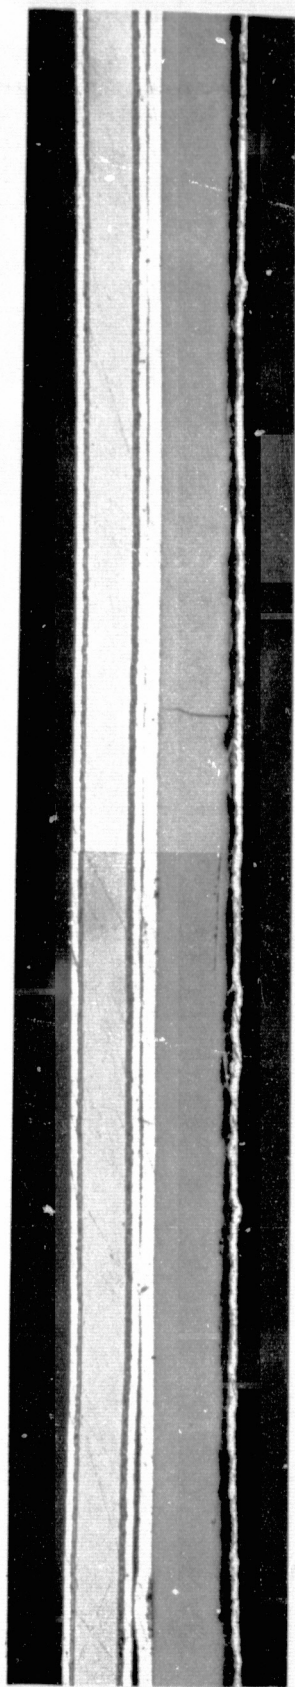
Joint No. 50A, Cross Section of Front Contact Weld
